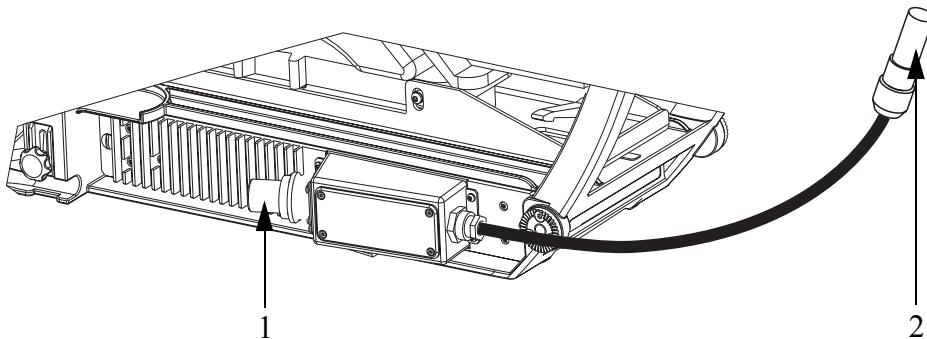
Left hand base unit for 1657D version with the cable removed from the chassis
